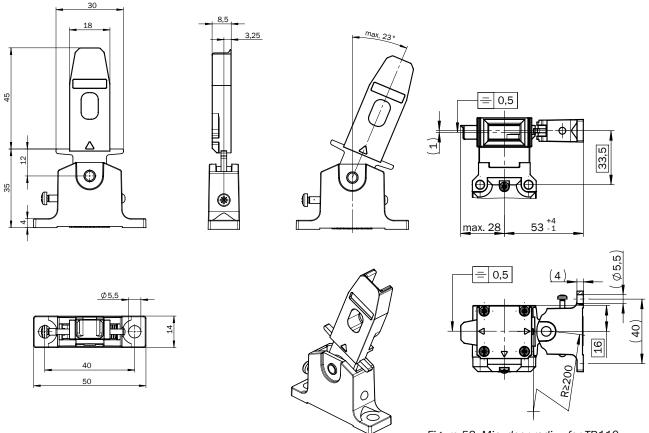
Dimensional drawing of TR110-XAFR hinged actuator (mm)
